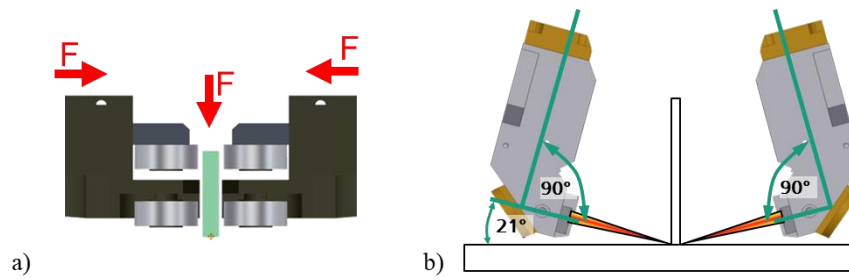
a) Schematic illustration of the profile clamping; b) Schematic illustration of the welding head configuration during welding
